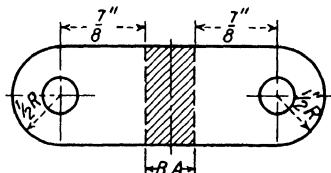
1/8-in. H.C. steel bent 90°, 1/4 in. radius of bend.
